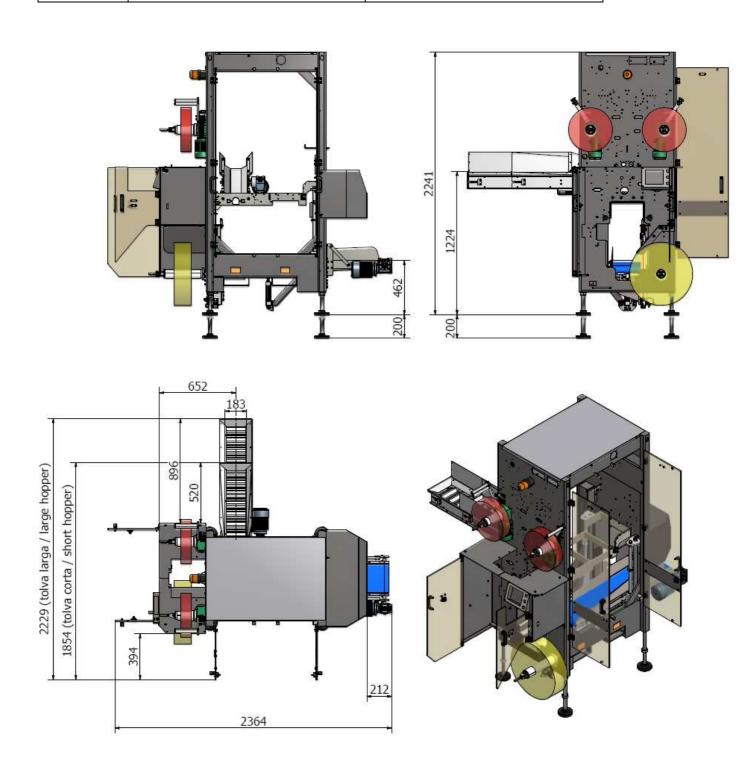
GIRBAGGER SOFT Machine lay-out
